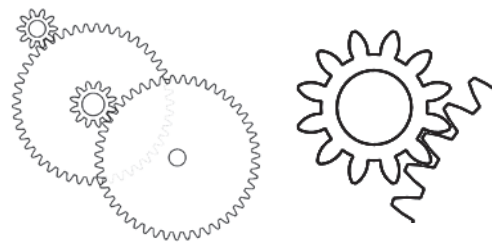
Gearing system of push-toy car. Design rules can result in parts of gear mesh being slightly welded together and must break free during initial use.
